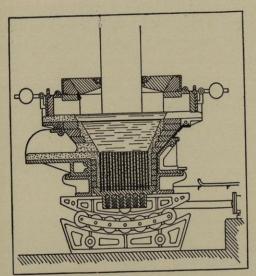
Keller's Furnace with Conducting Hearth (sectional elevation).
